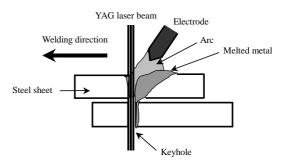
Configuration of laser beam and arc electrode in laser-arc hybrid welding
